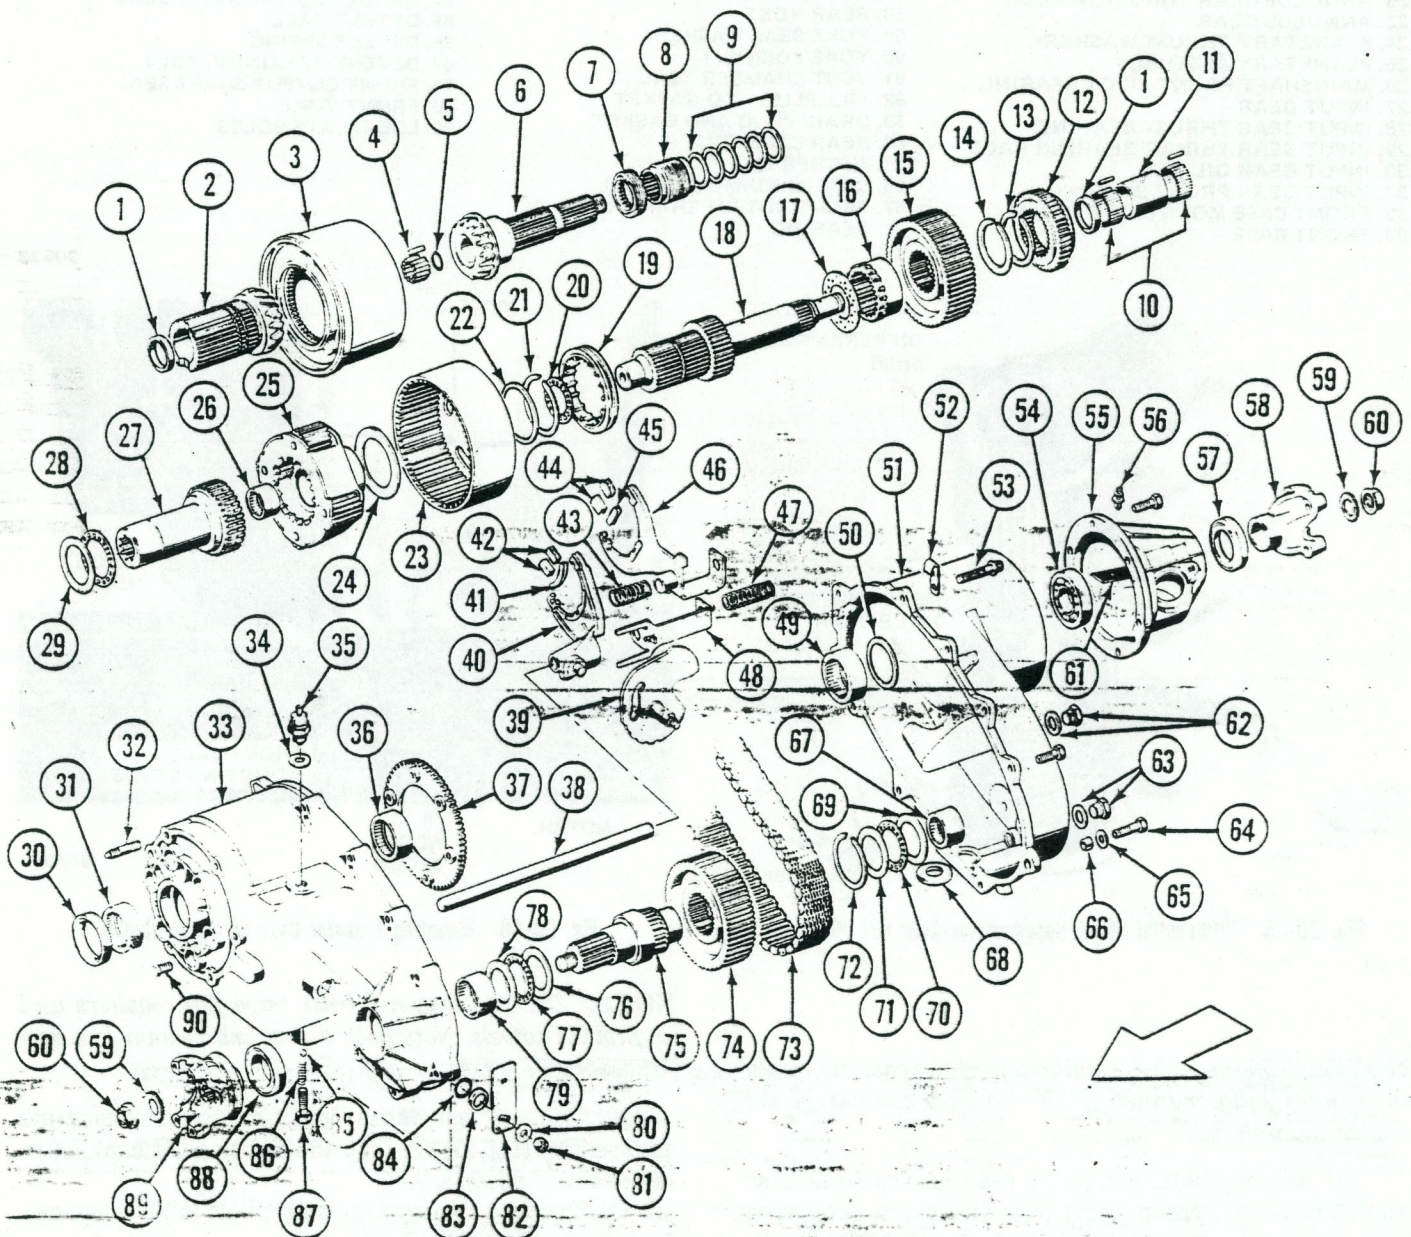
D-44 Model 219 Quadra-Trac Transfer Case
